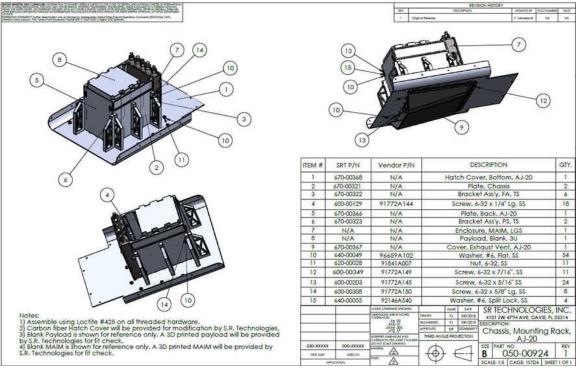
Jump-20 Primary Mount Assembly Drawing
